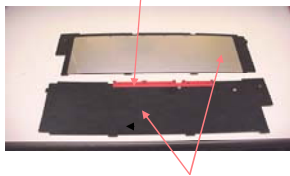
shows a Defective panel, both sides of the panel are shown. The Red spacer must be removed and reused. This procedure is shown in Figures 2, 3 & 4.
